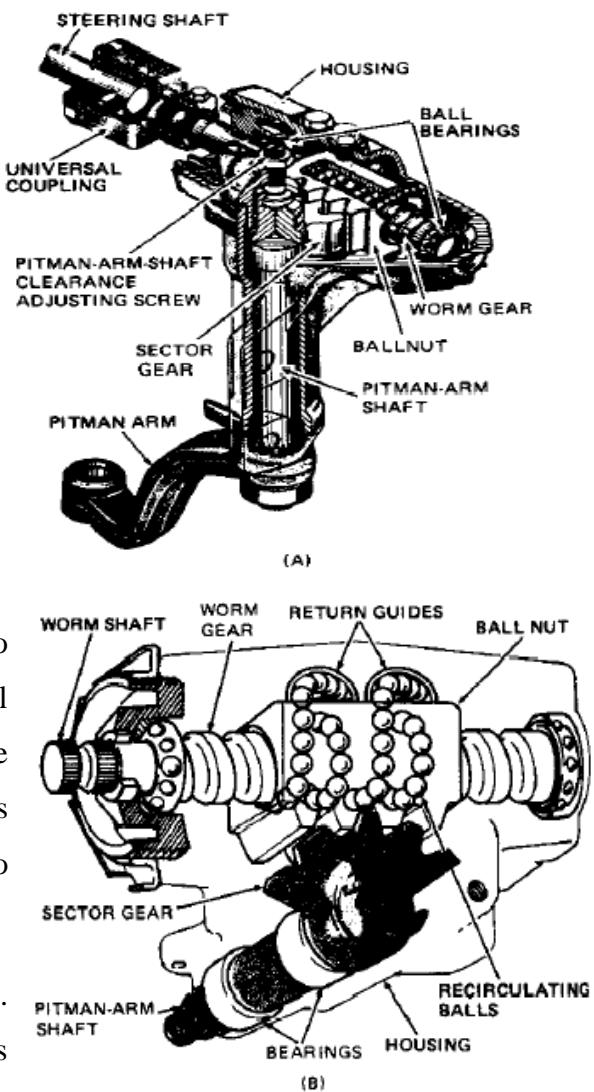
Manual recirculating-ball steering gear. (A) Cutaway to show construction. (B) Phantom view of nut and recirculating balls. (Chrysler Corporation, Ford Motor Company)
